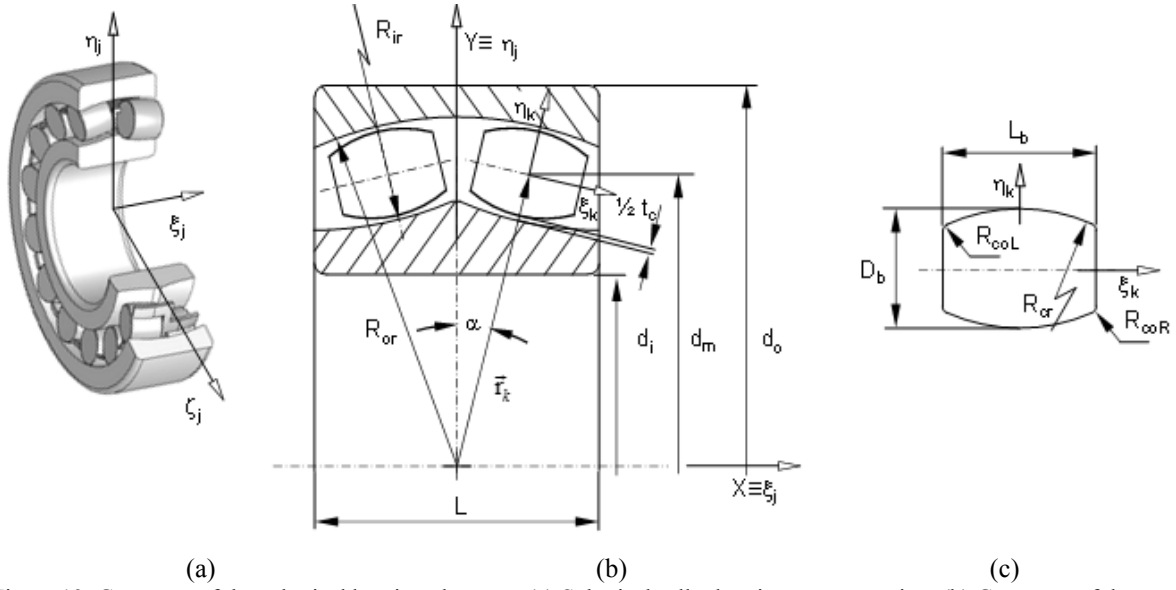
Geometry of the spherical bearing elements. (a) Spherical roller bearing representation; (b) Geometry of the cross-section of the roller bearing; (c) Geometry of the roller.
